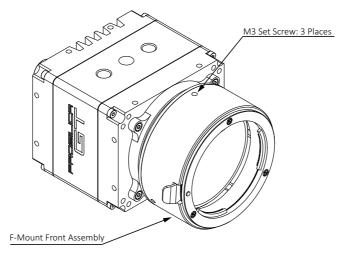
Prosilica GT Large Format with F-Mount isometric view
